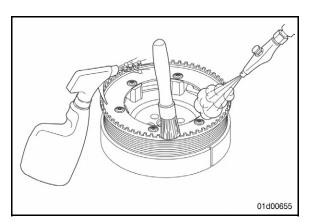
CLEAN OIL FROM THE DAMPER AND CRANKSHAFT SPEED INDICATOR RING
